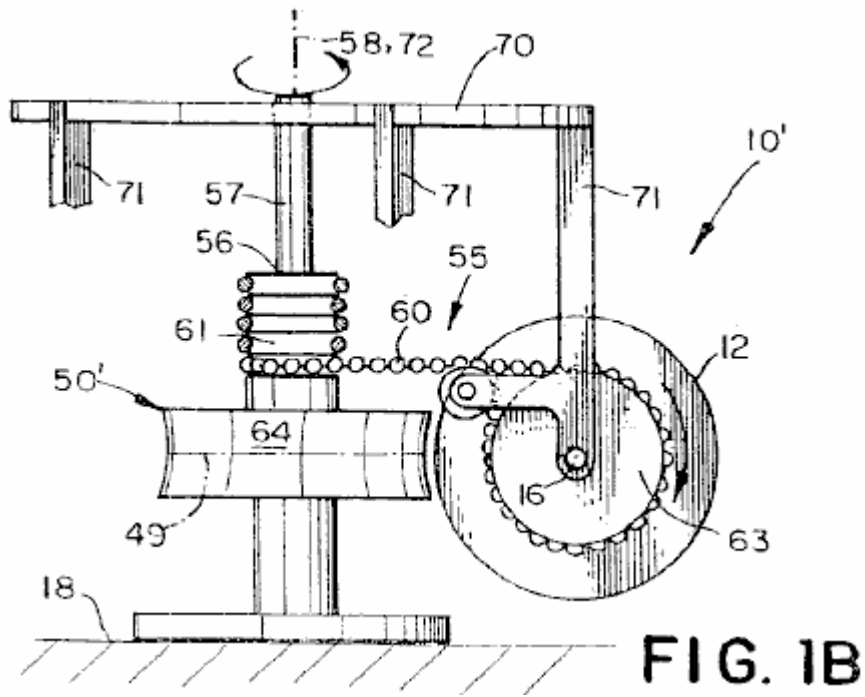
B is a schematic perspective drawing of a second preferred embodiment of the motor;
